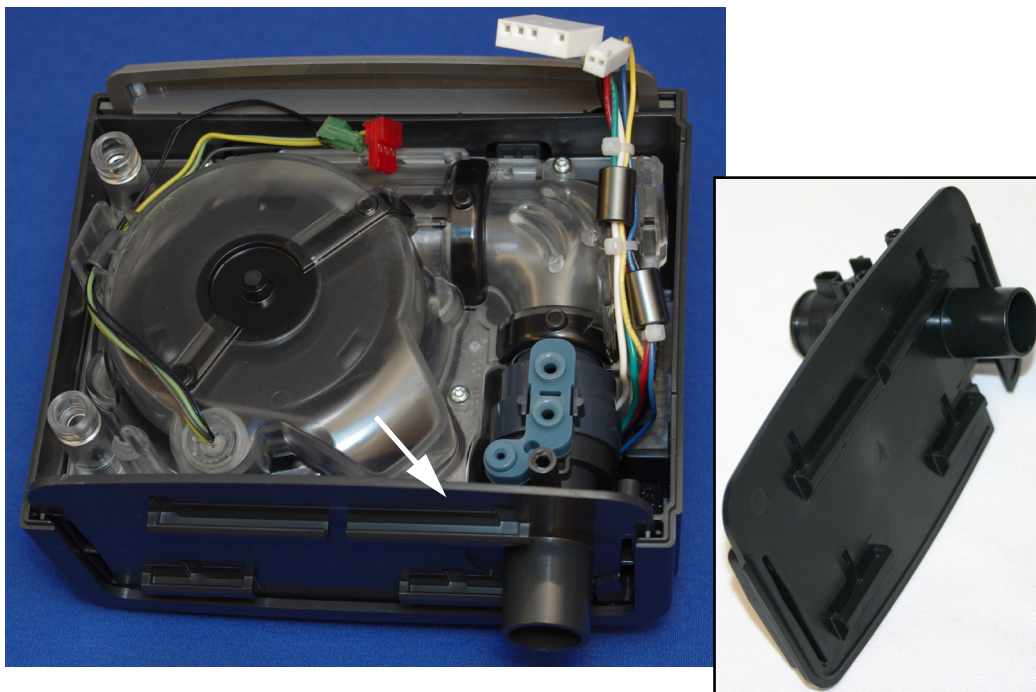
RIGHT PANEL ASSEMBLY
